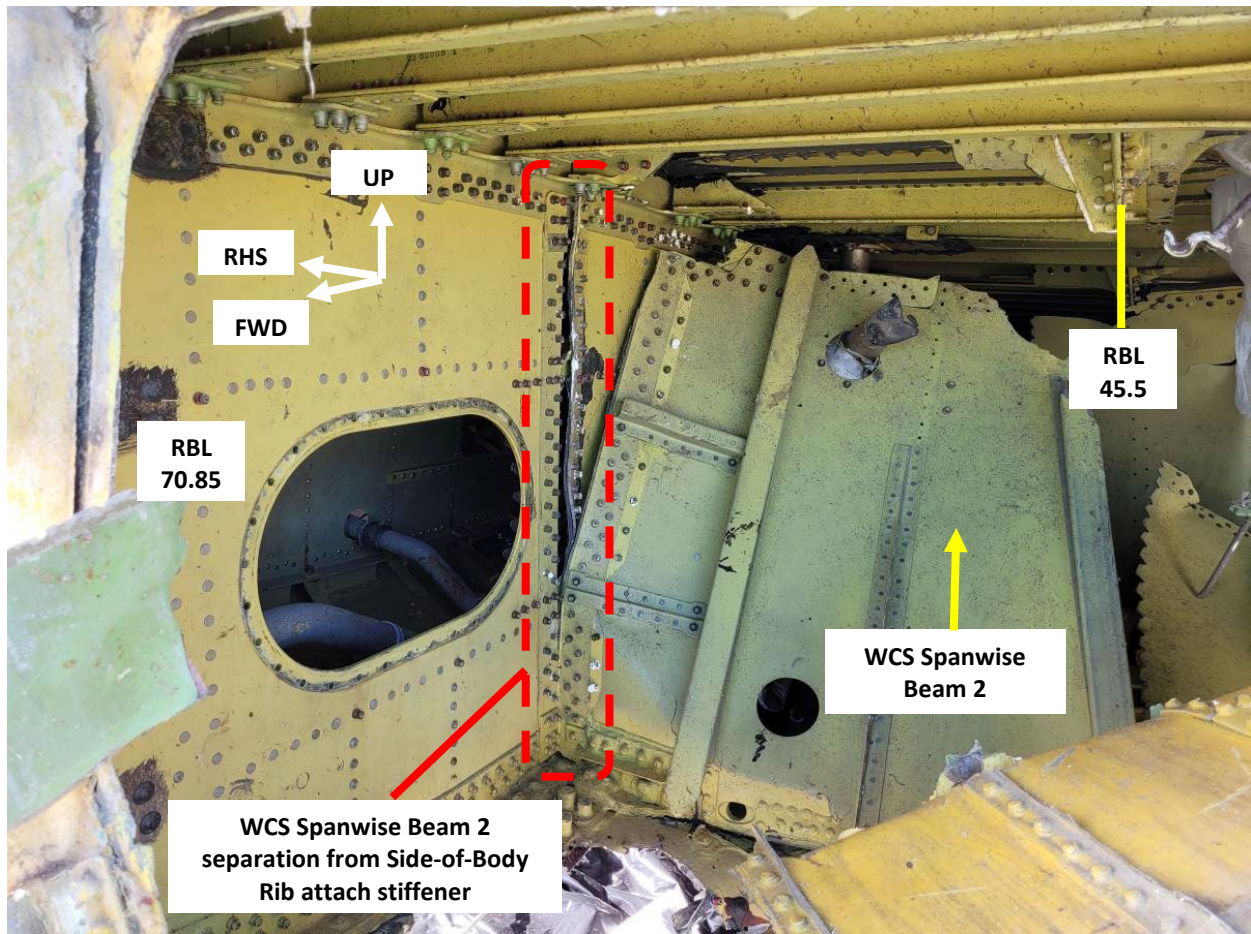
Damage to the right side WCS Spanwise Beam 2-to-SOB Rib attach stiffener (Boeing photo)
